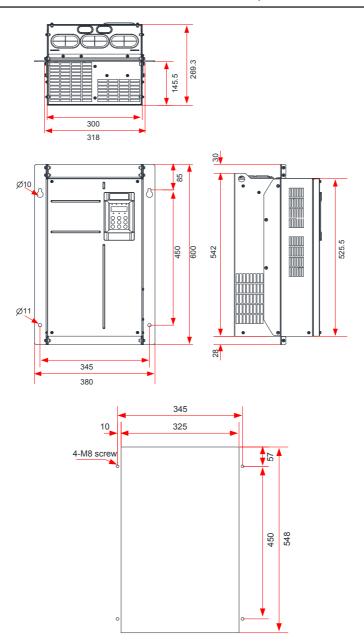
Dimensions of through hole mounting bracket and hole of MD500ET45G(B) to MD500ET55G(B)
